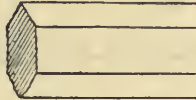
HEXAGONAL BAR FOR MAKING A BOLT.
